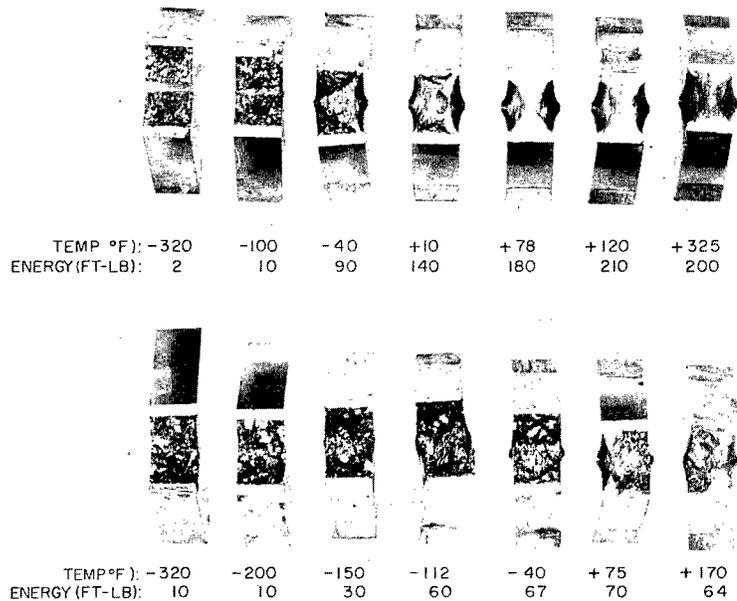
Fracture surfaces of (a) cold-worked, vacuum-annealed and (b) as-melted Charpy impact test bars
